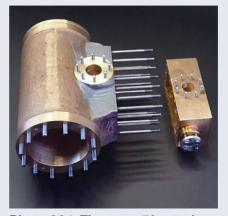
There are 70+ studs altogether in the LP cylinder assembly. A small capstan lathe might be a great addition to the workshop!
